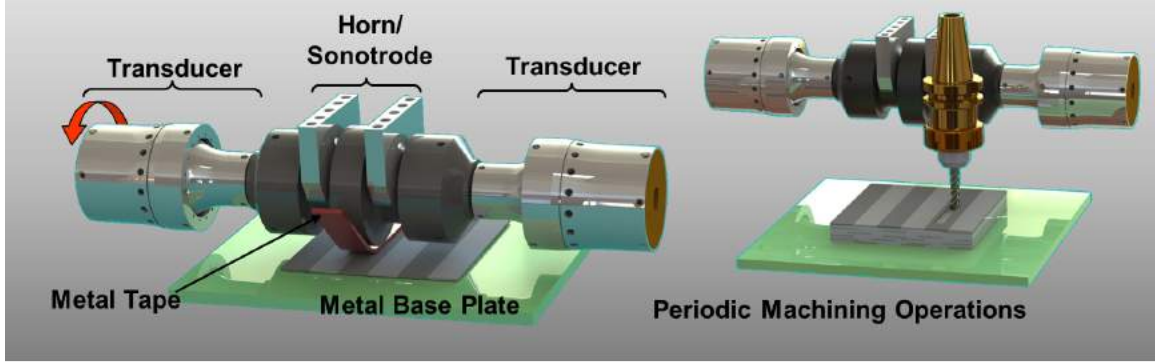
UAM system tools for ultrasonic welding and milling operations. (Courtesy of Fabrisonic)
